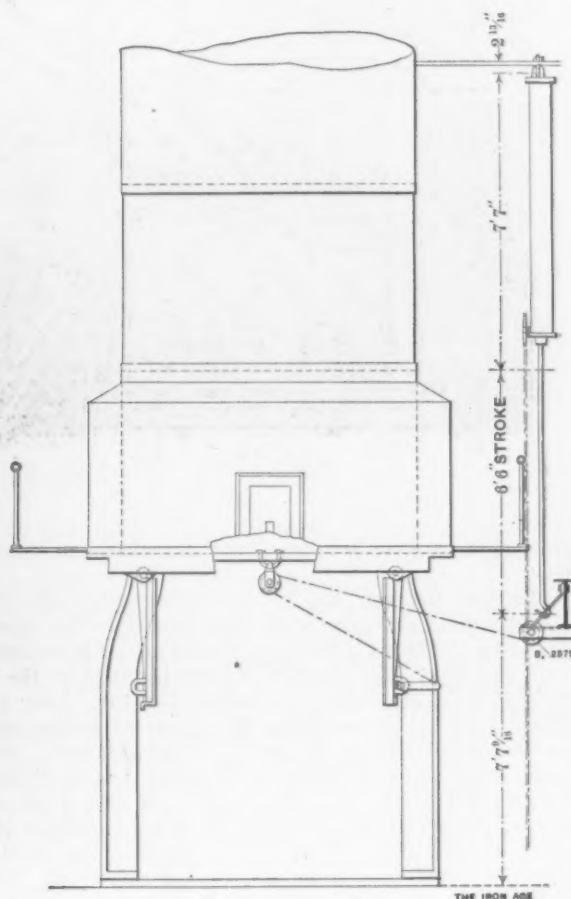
Hoisting Arrangement for Lifting Bottom Doors of the Cupola.
